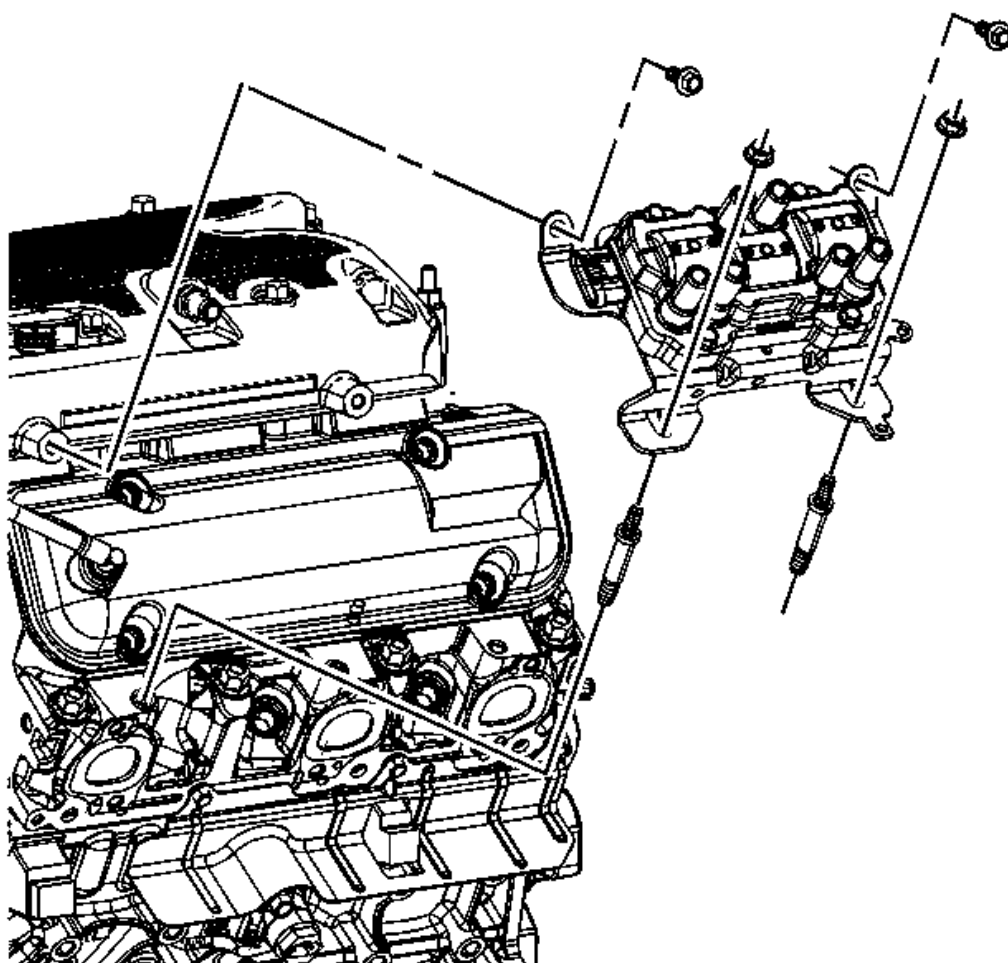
Identifying Ignition Coil Assembly Bolts And Nuts
